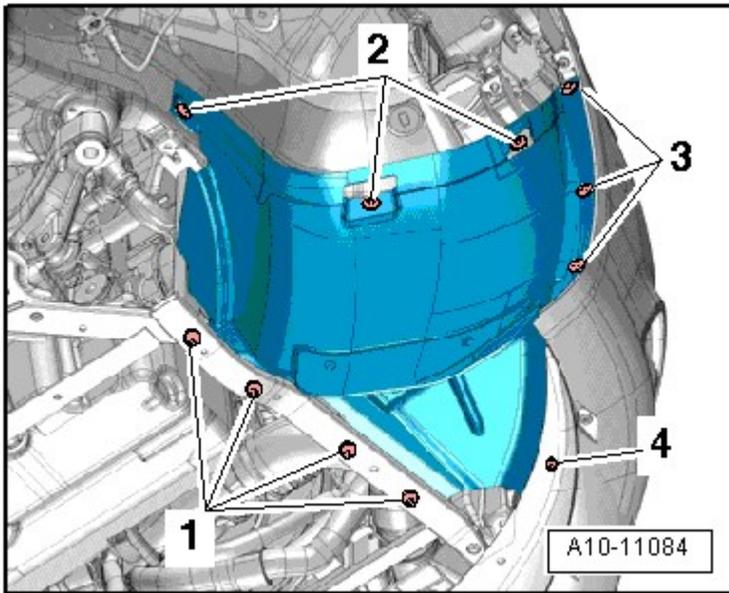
Front Section Of The Right Front Wheel Housing Liner
